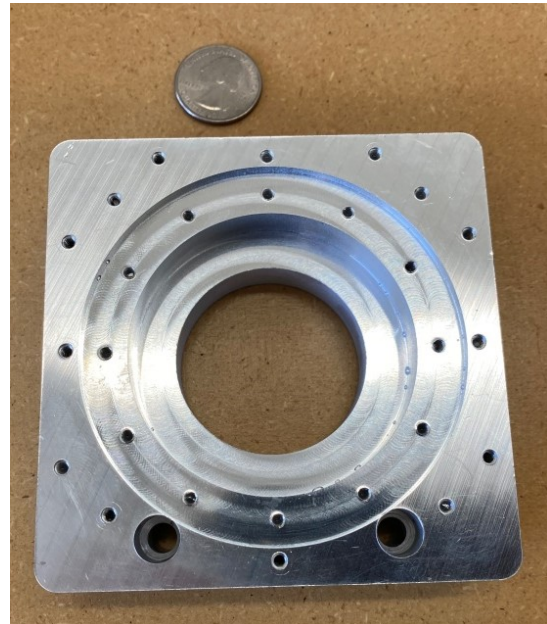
Part of the fabricated harmonic drive housing used to secure the components into their proper place
